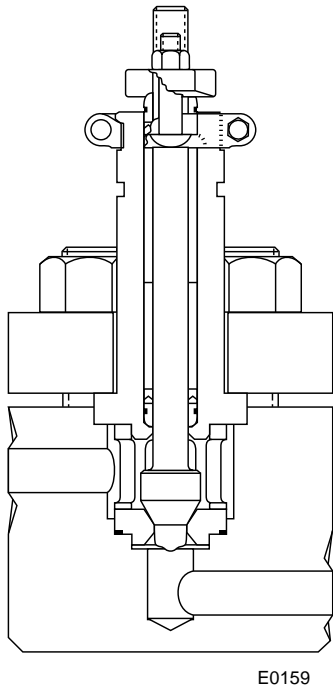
Mark Two Offset with Butt-weld Ends
